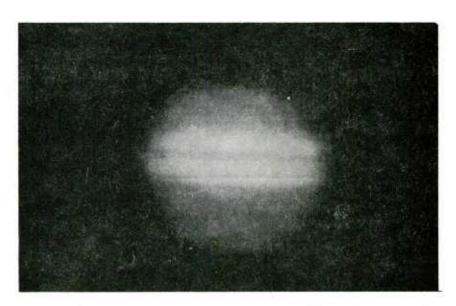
RADIOGRAPHY - INCOMPLETE PENETRATION PARTIAL PENETRATION WELD A/PT-11
